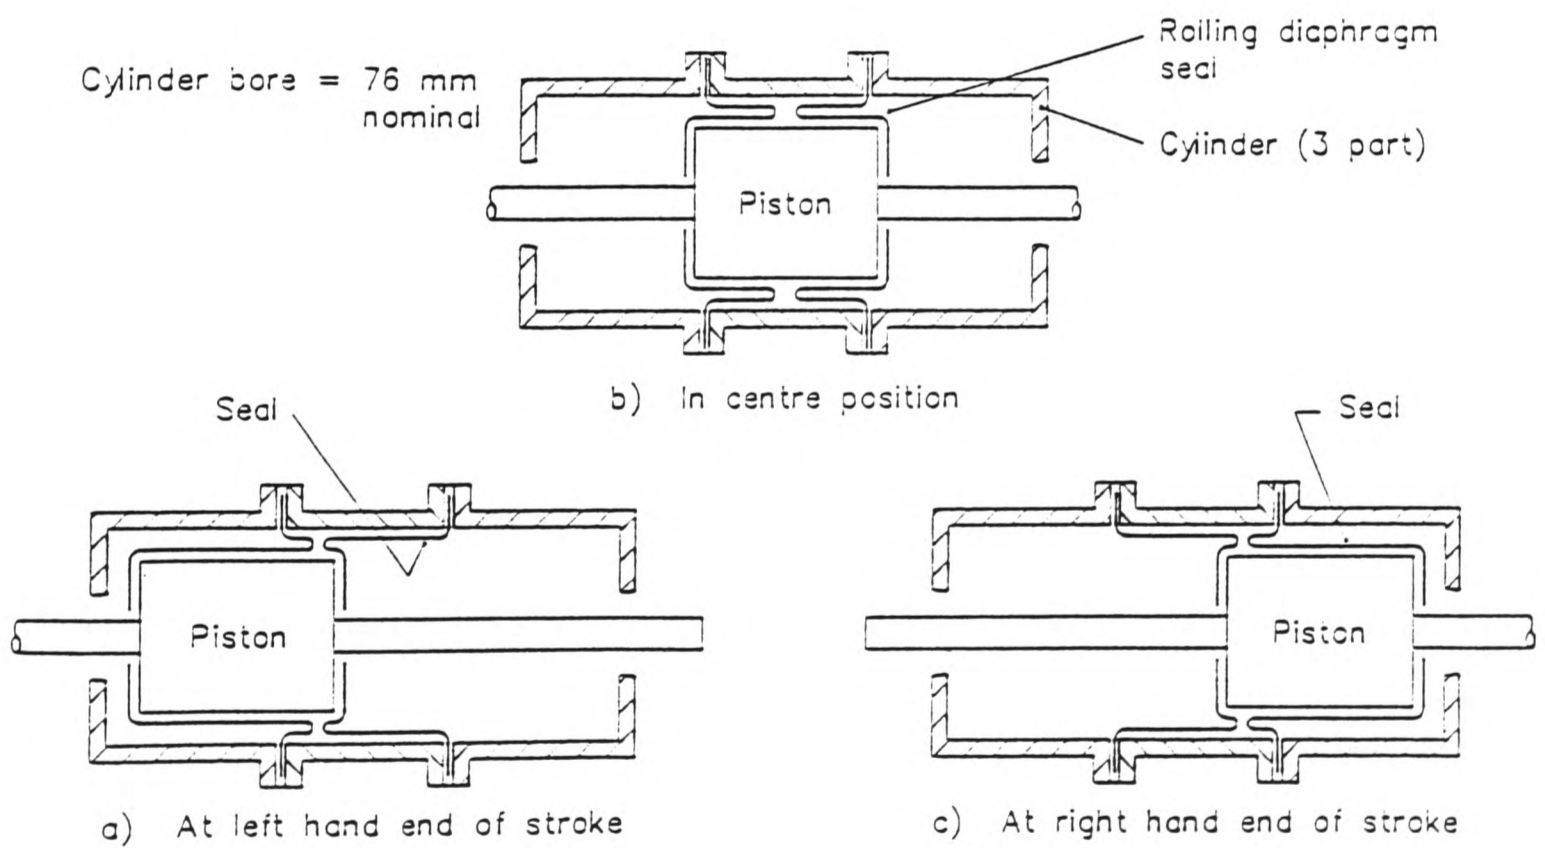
The rubber diaphragm seal assembly used in cylinder 2
